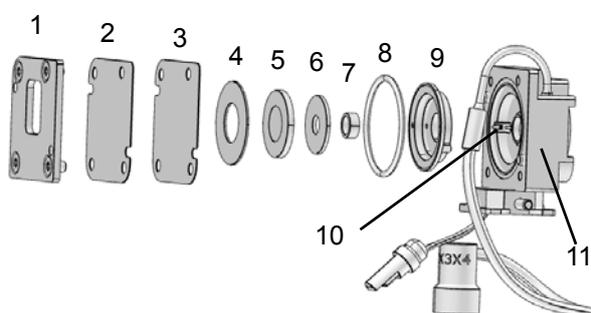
Exploded-view drawing of the battery sample holder (Transmission)
